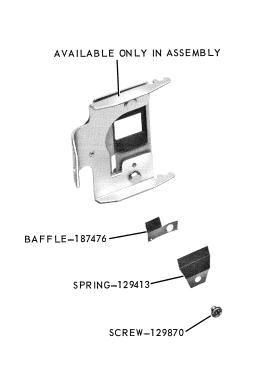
APERTURE PLATE AND PAD ASSEMBLY-181893
